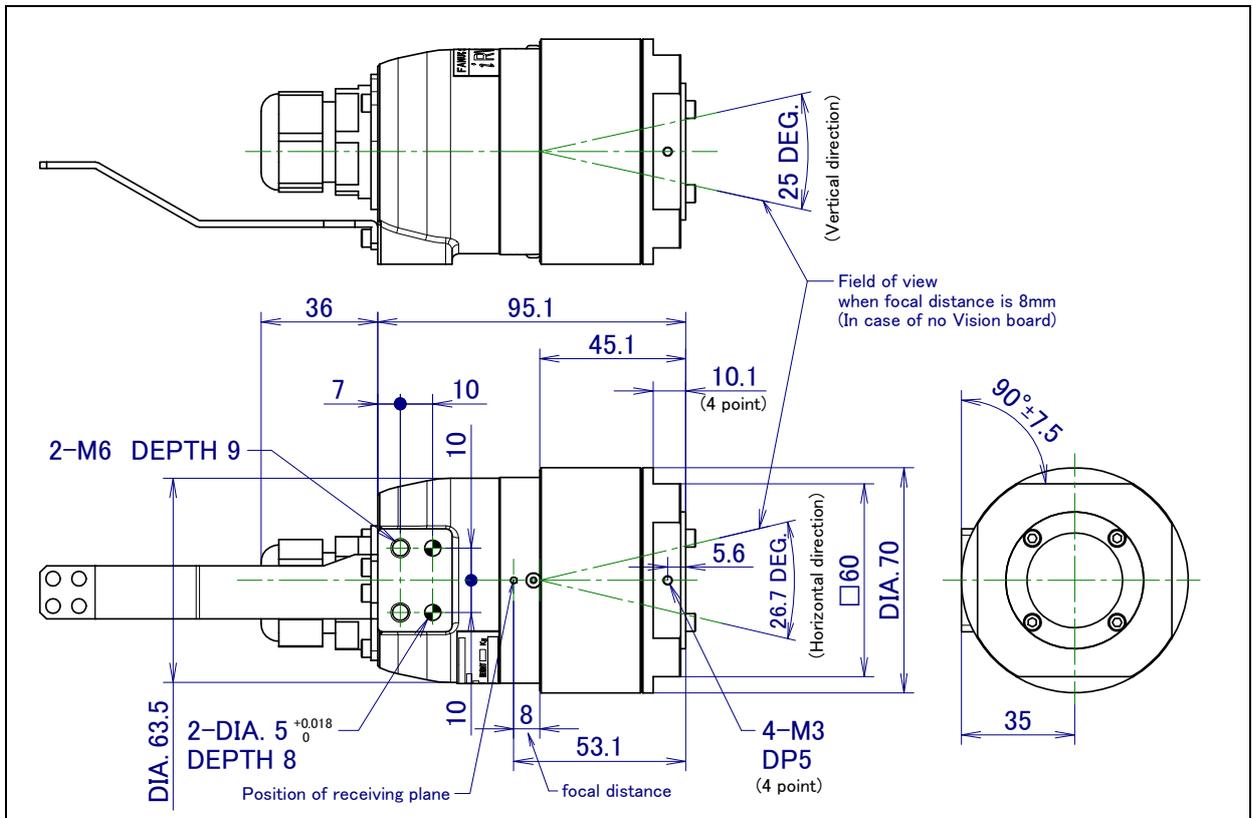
(b) External dimension and vision range of sensor head of camera package (with LED light)
